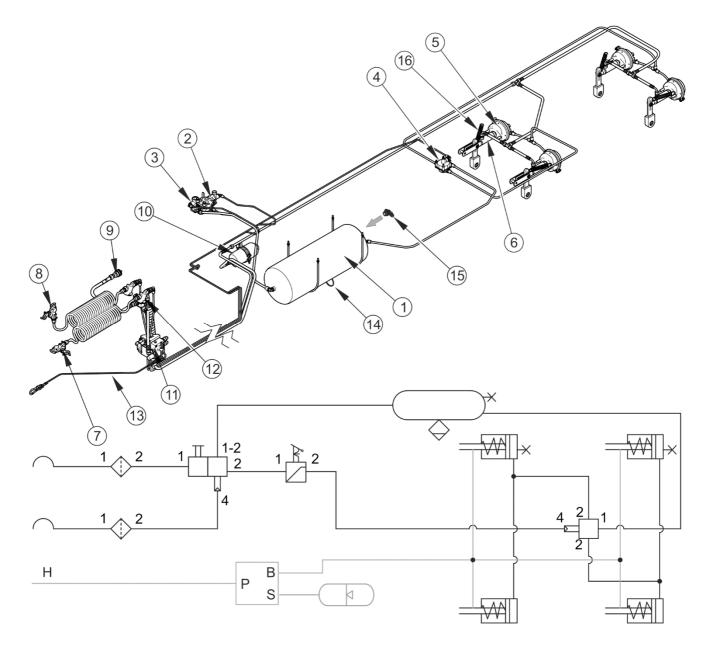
Design and diagram of combined braking system (double conduit pneumatic braking system + hydraulic braking system with mechanical protection valve)
